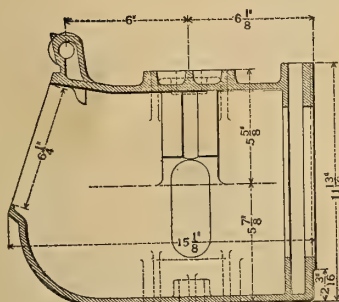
GOULD JOURNAL BOX. GOULD COUPLER Co., MAKERS.
